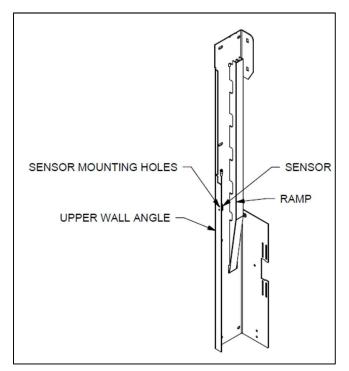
RIGHT HAND UPPER WALL ANGLE ASSEMBLY
